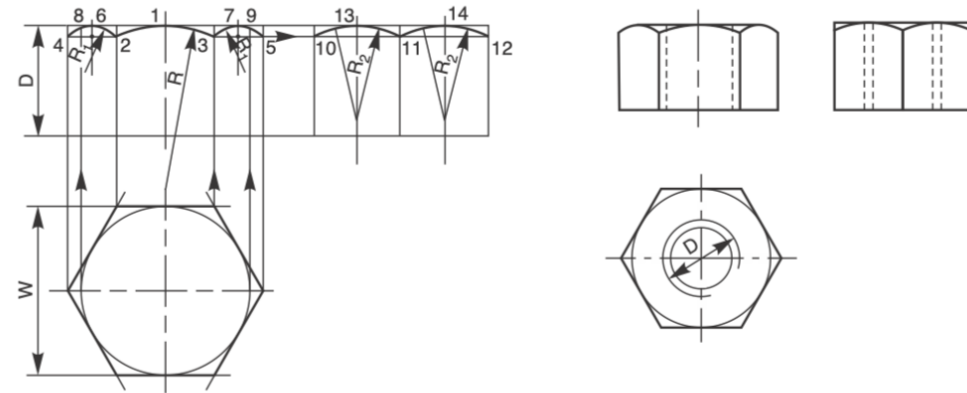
Method of drawing views of a hexagonal nut (Method I)
